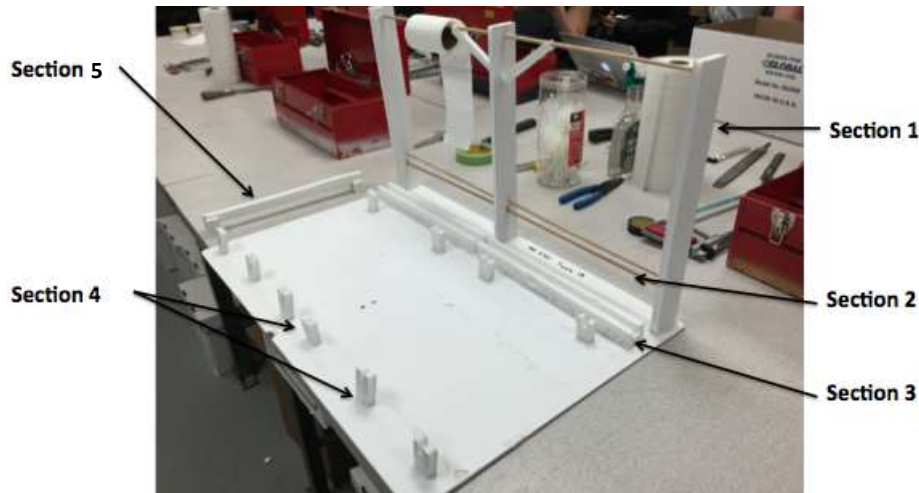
Isometric view of mockup where Section 1 represents the foil roll holder, Section 2 is the loading system, Section 3 is the V-groove cutting mechanism, Section 4 is the frame holder, and Section 5 is the new clamp design.
